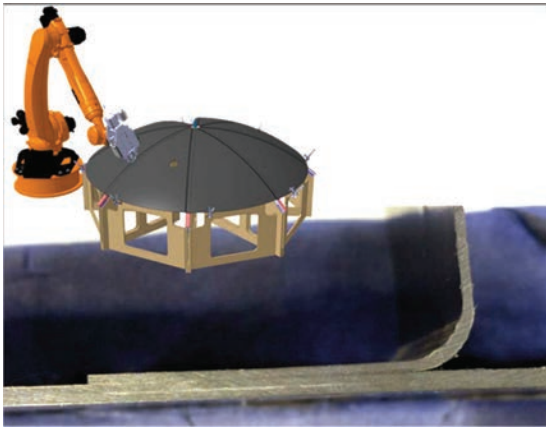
Ultrasonic welding head of the DLR-center and specimen of welded joint from TPC on the base of unidirectional carbon fiber and PEKK for tests on L-tear [9]
